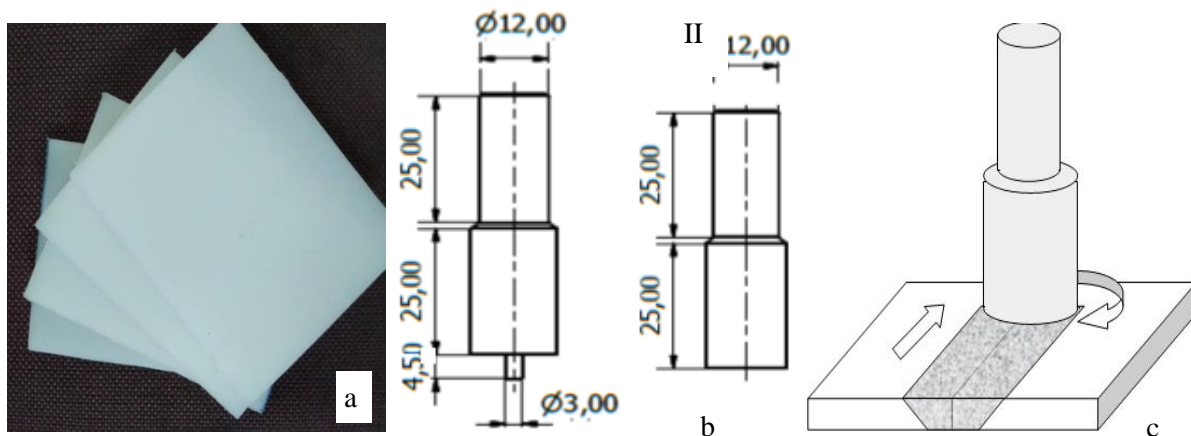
(a) HDPE Plates, (b) The two FSW tool geometry, (c) Schematic of FSW processes.
